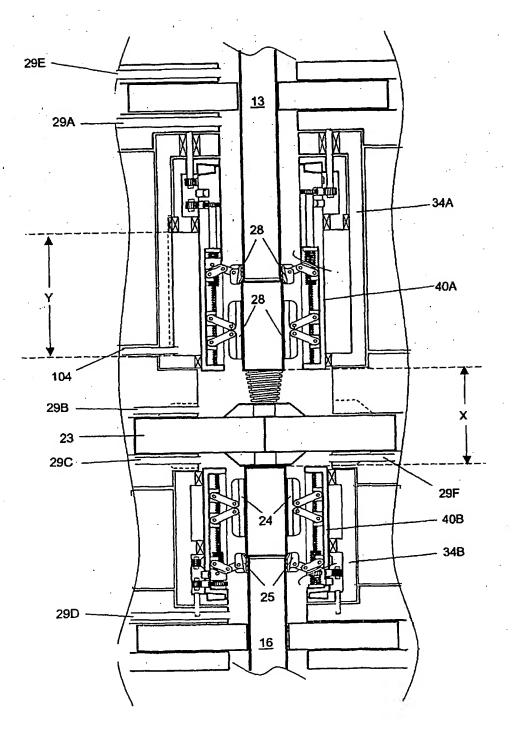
Upper & Lower Grips & Slips (Connecting without raising drill string)
